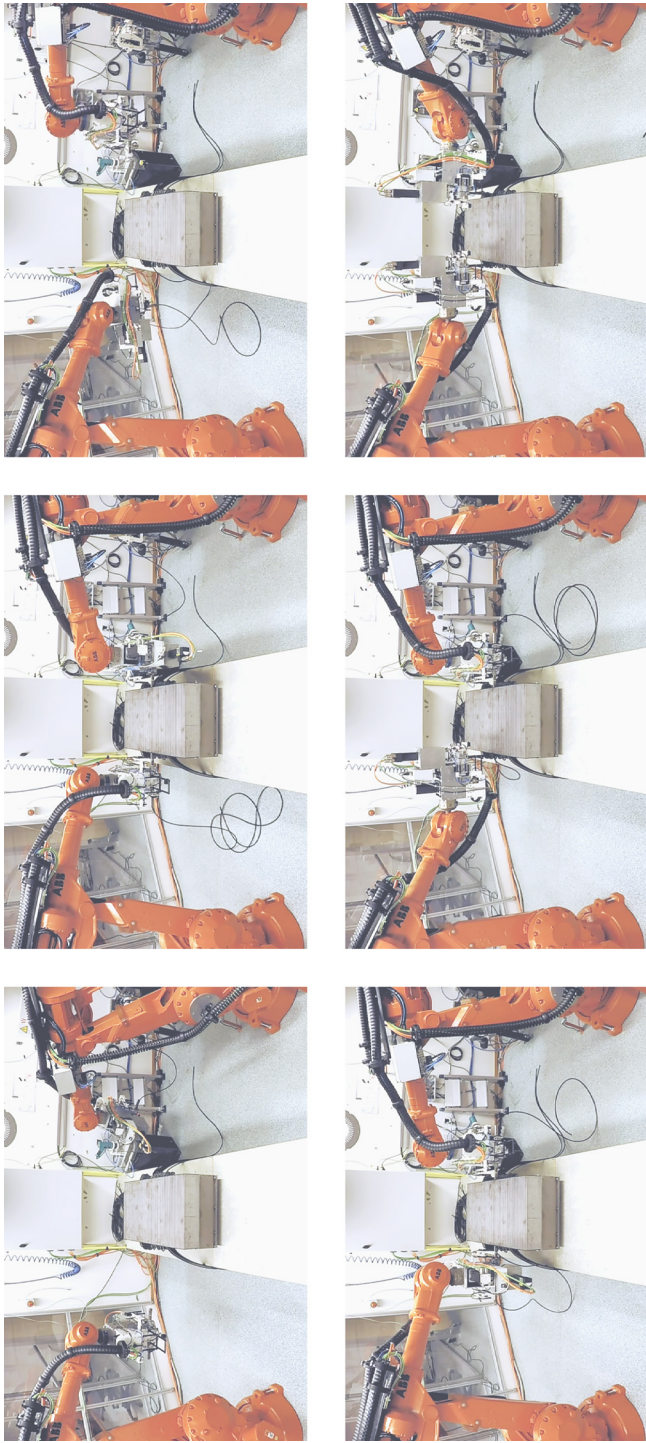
Photos of the robotized stator cable winding experiments: R1 is preparing a cable end (top left), R1 is feeding the cable from the drum through the stator section and to R2 (top middle), R1 has dropped the cable and R2 is searching for the cable end (top right), the cable is fed through the stator section from R2 to R1 (bottom left), R1 is pulling the cable end while R2 is holding down the end winding (bottom middle) and R1 and R2 are pushing down the end windings (bottom right).
